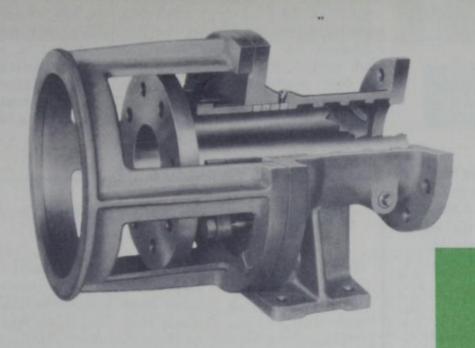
Webster Single Slip Type C Expansion Joint, Crosshead Guided, Flanged and with Integral Anchor. Note strong crosshead and long spiral internal guides which keep in contact with slip tube throughout entire traverse.
